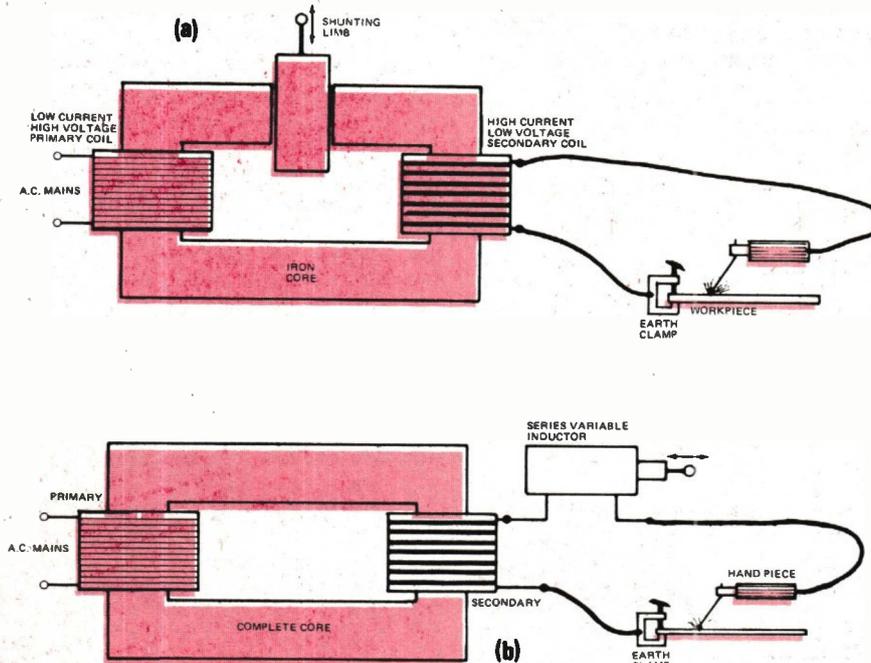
The amount of in-line inductance alters the harshness of the weld attack.
